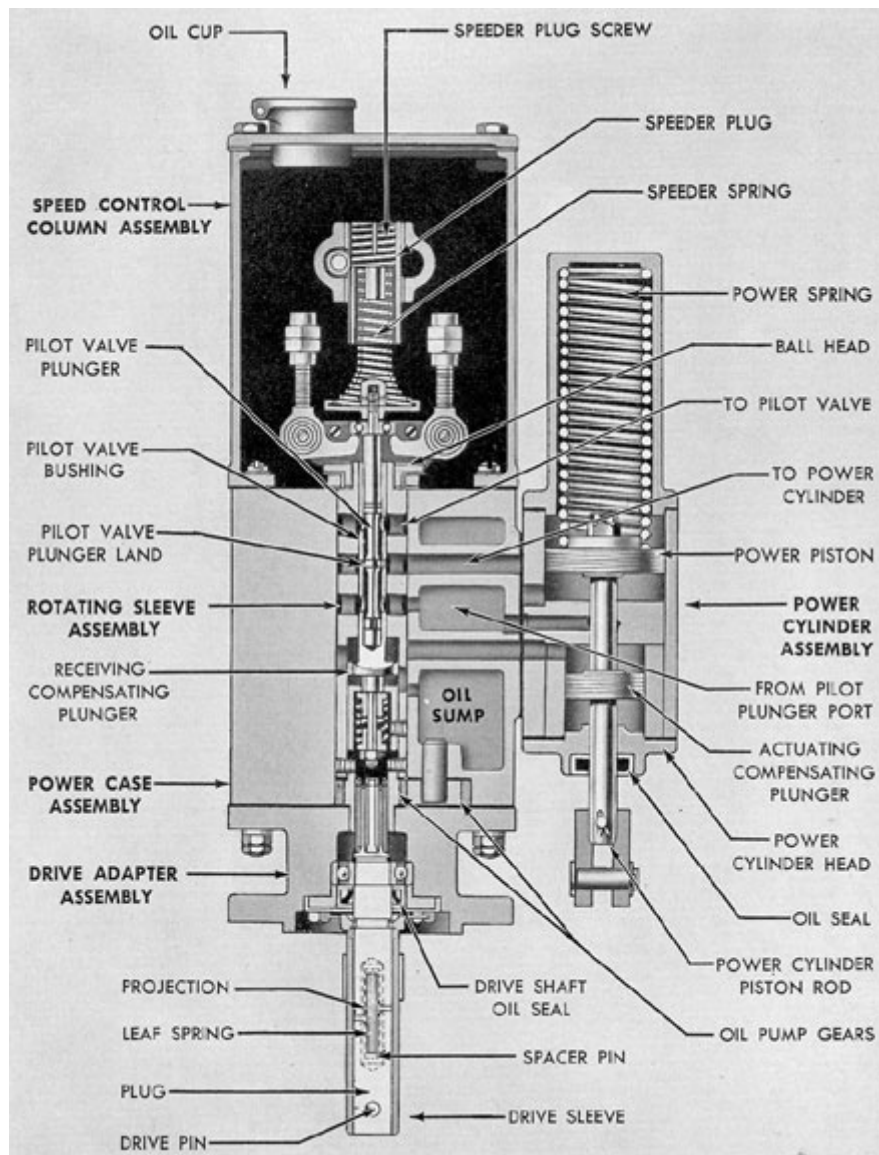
Governor-sections through adapter, power, case, power cylinder and rotating sleeve assembly.
